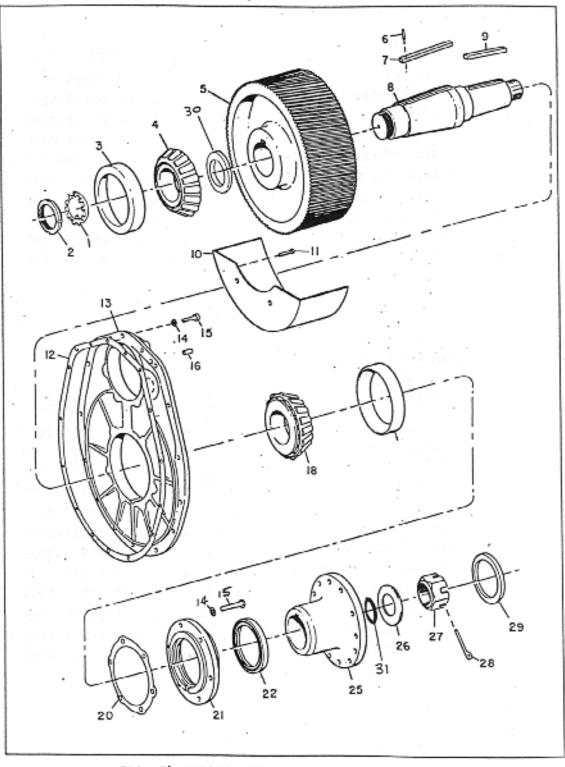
OUTPUT GEAR AND RELATED PARTS HY-6900
